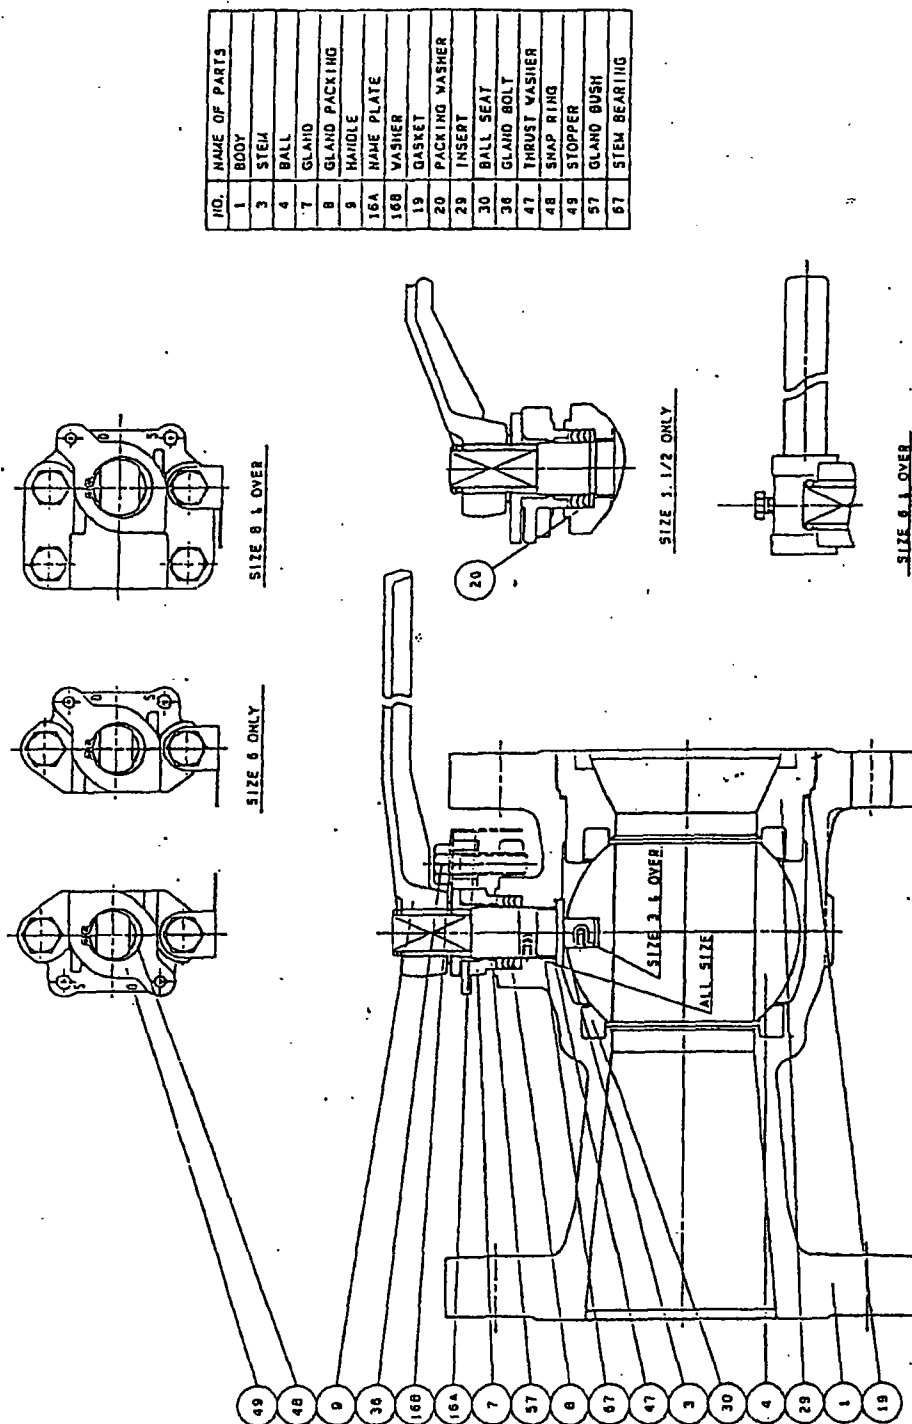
Cross-sectional assembly drawing of 1½" to 10" valves
